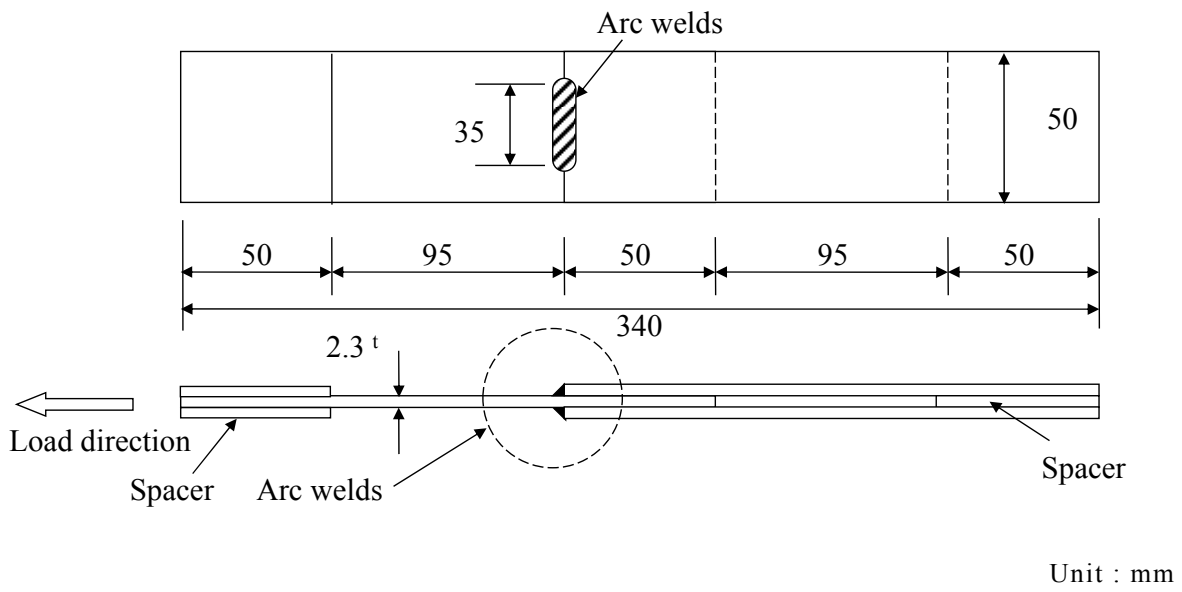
Schematic representation of three-sheet arc welded lap joints with weld start and end points
